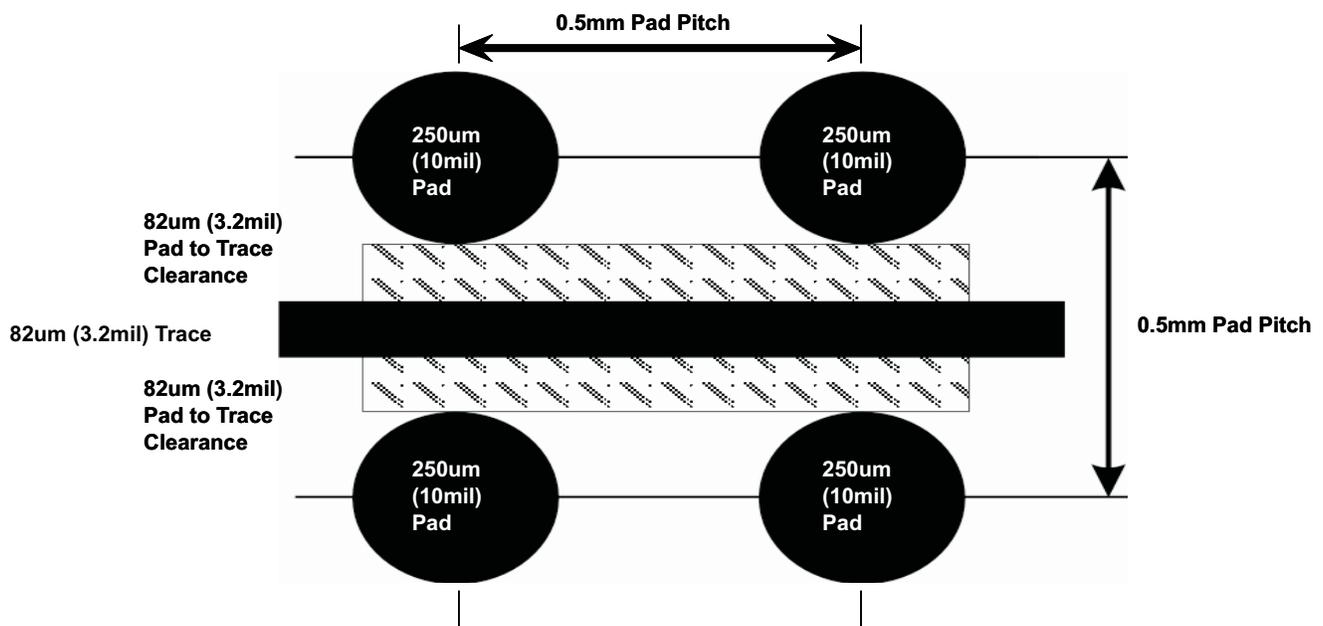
PCB Via Dimensions for 0.5mm Pitch Packages - Top Layer
